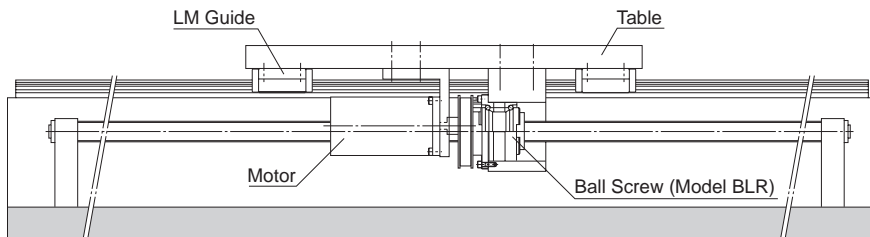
Example of Installation on the Table (Screw Shaft Fixed)
